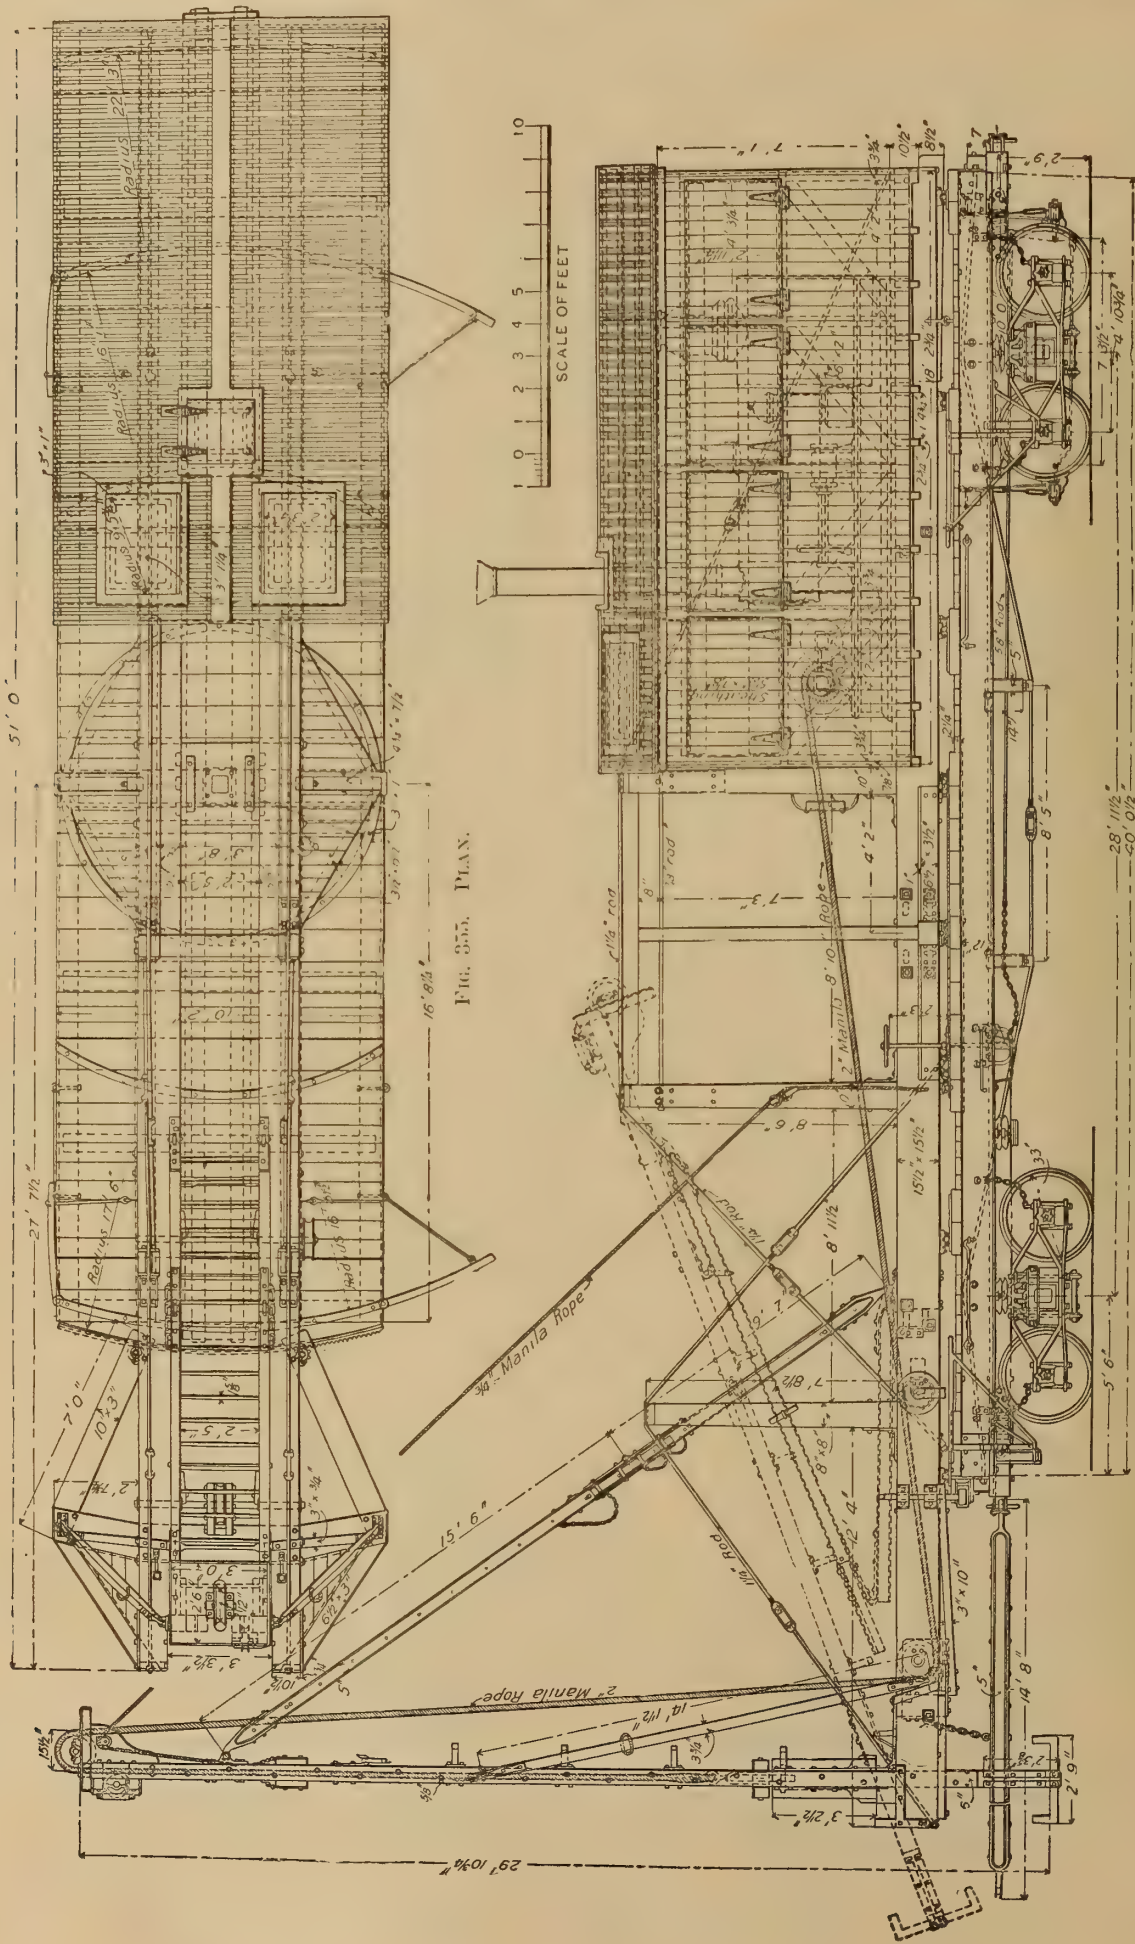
SIDE ELEVATION. PILE DRIVER CAR. CHICAGO & NORTH WESTERN.
